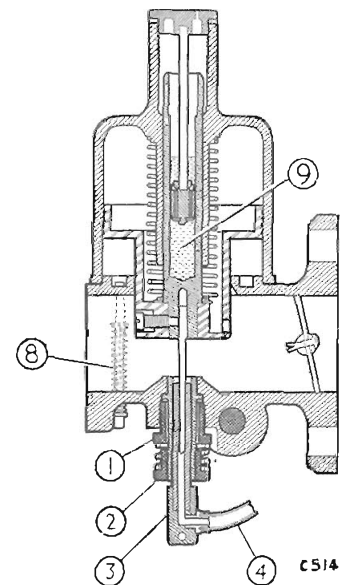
Cross section of carburettor showing jet and piston assemblies
